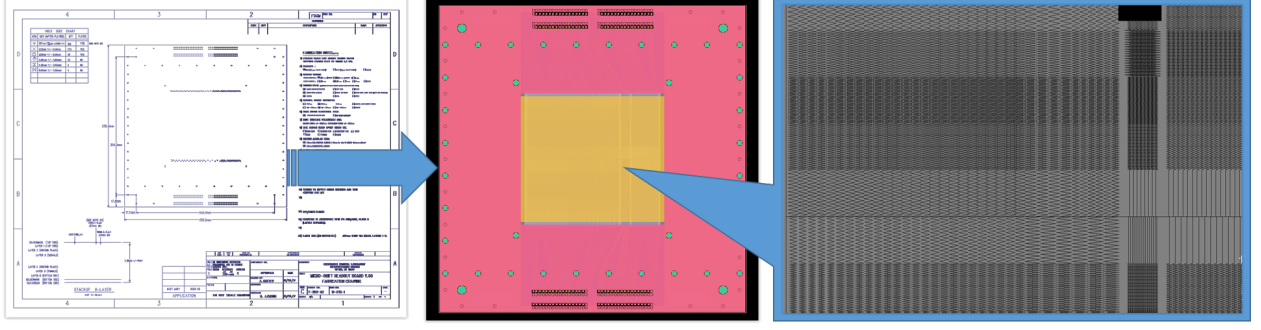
Fabrication drawing for the multi-zigzag PCB, in addition to the PCB layout and a zoom-in on a multitude of zigzag geometries.
